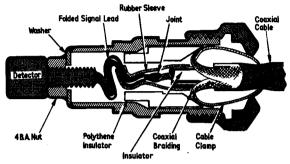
b: Section through the completed assembly of the s.s.b. detector mounting.
